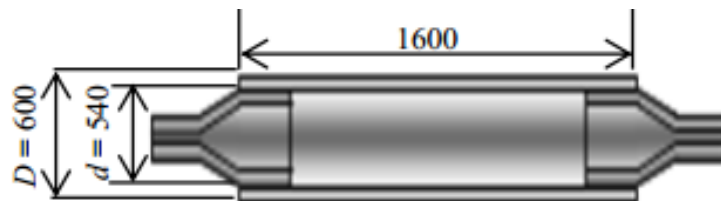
Typical sleeve roll and roller in steel mill.
